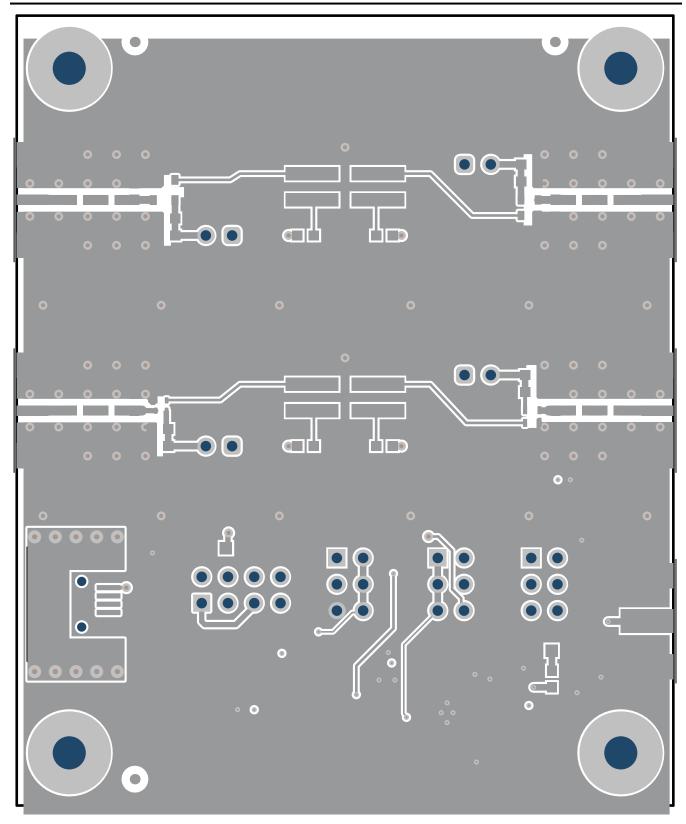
PCB Layout Example From CDC6 EVM - Top Layer
